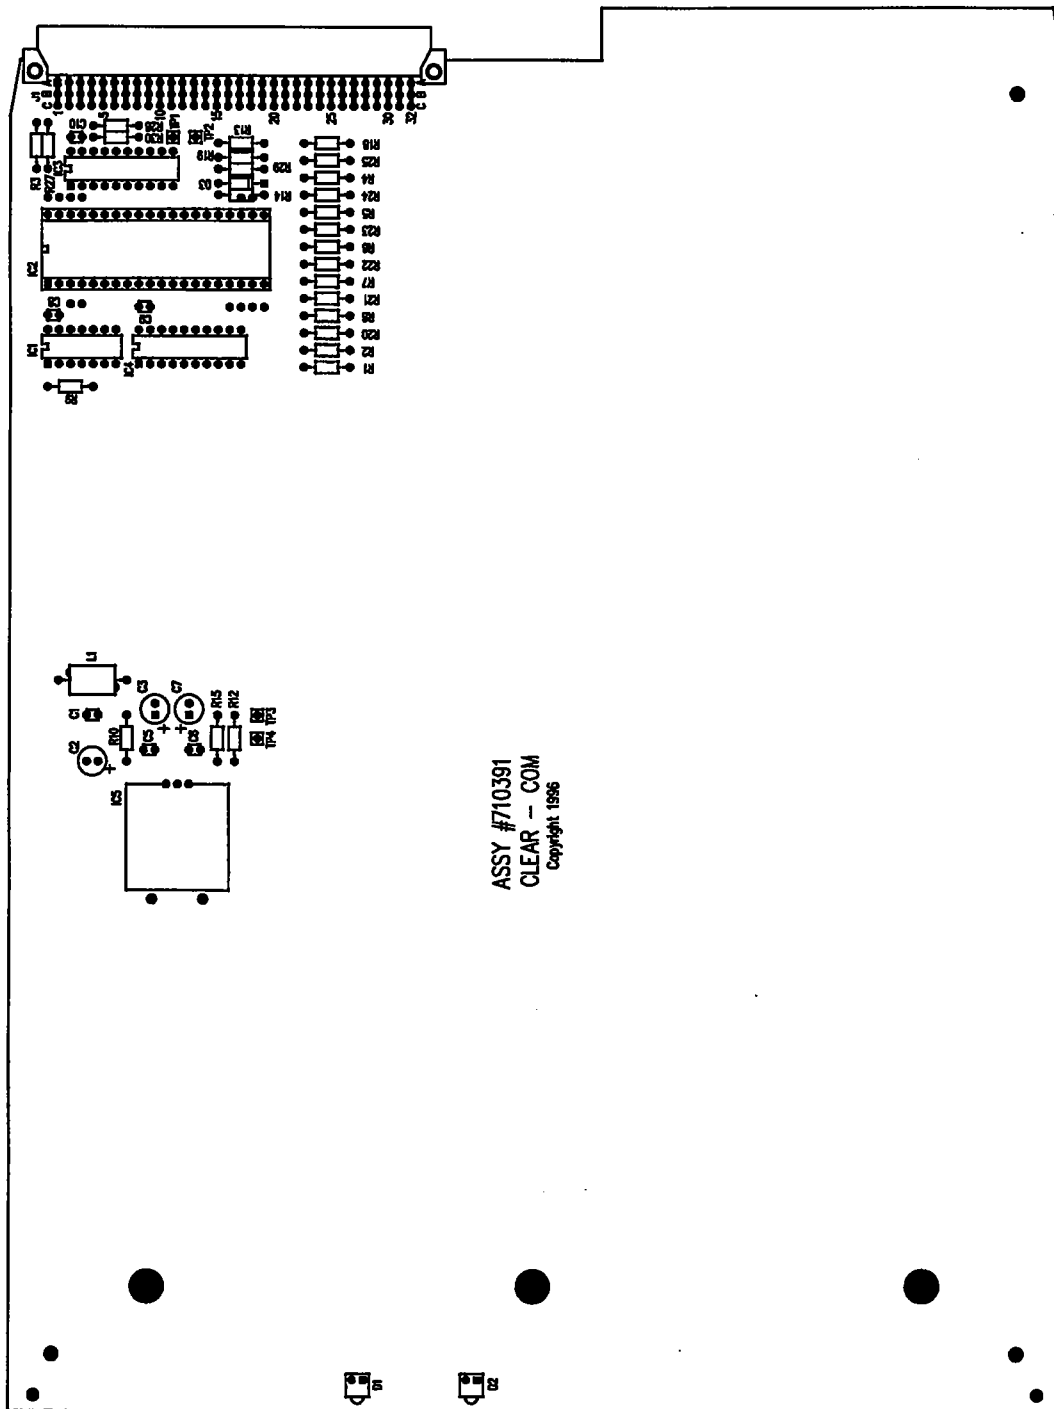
CLOCK-1 Assembly Drawing, Rev. A
